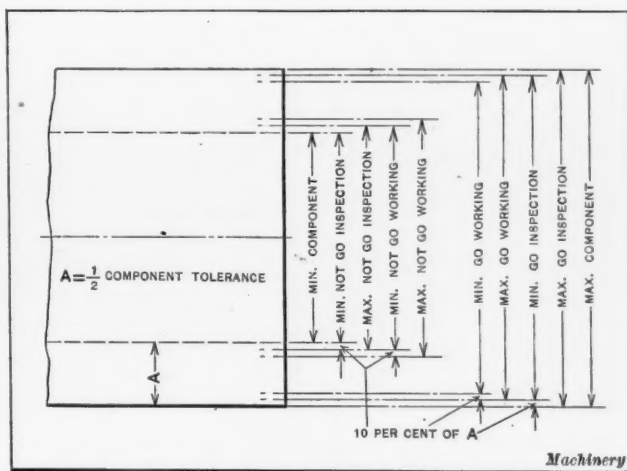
Diagrammatic Illustration showing Differences between Working and Inspection Gages and Tolerances on these Gages.
